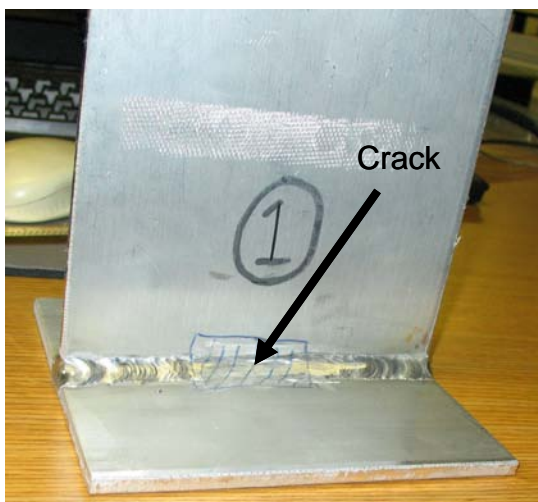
Optical Images of Welding Joint Crack Samples
